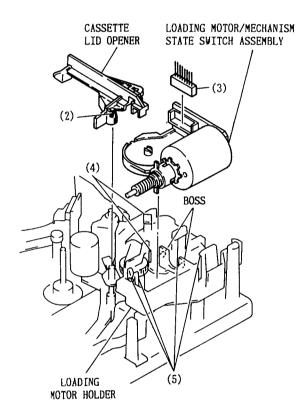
Loading Motor/Mechanism State Switch Assembly
